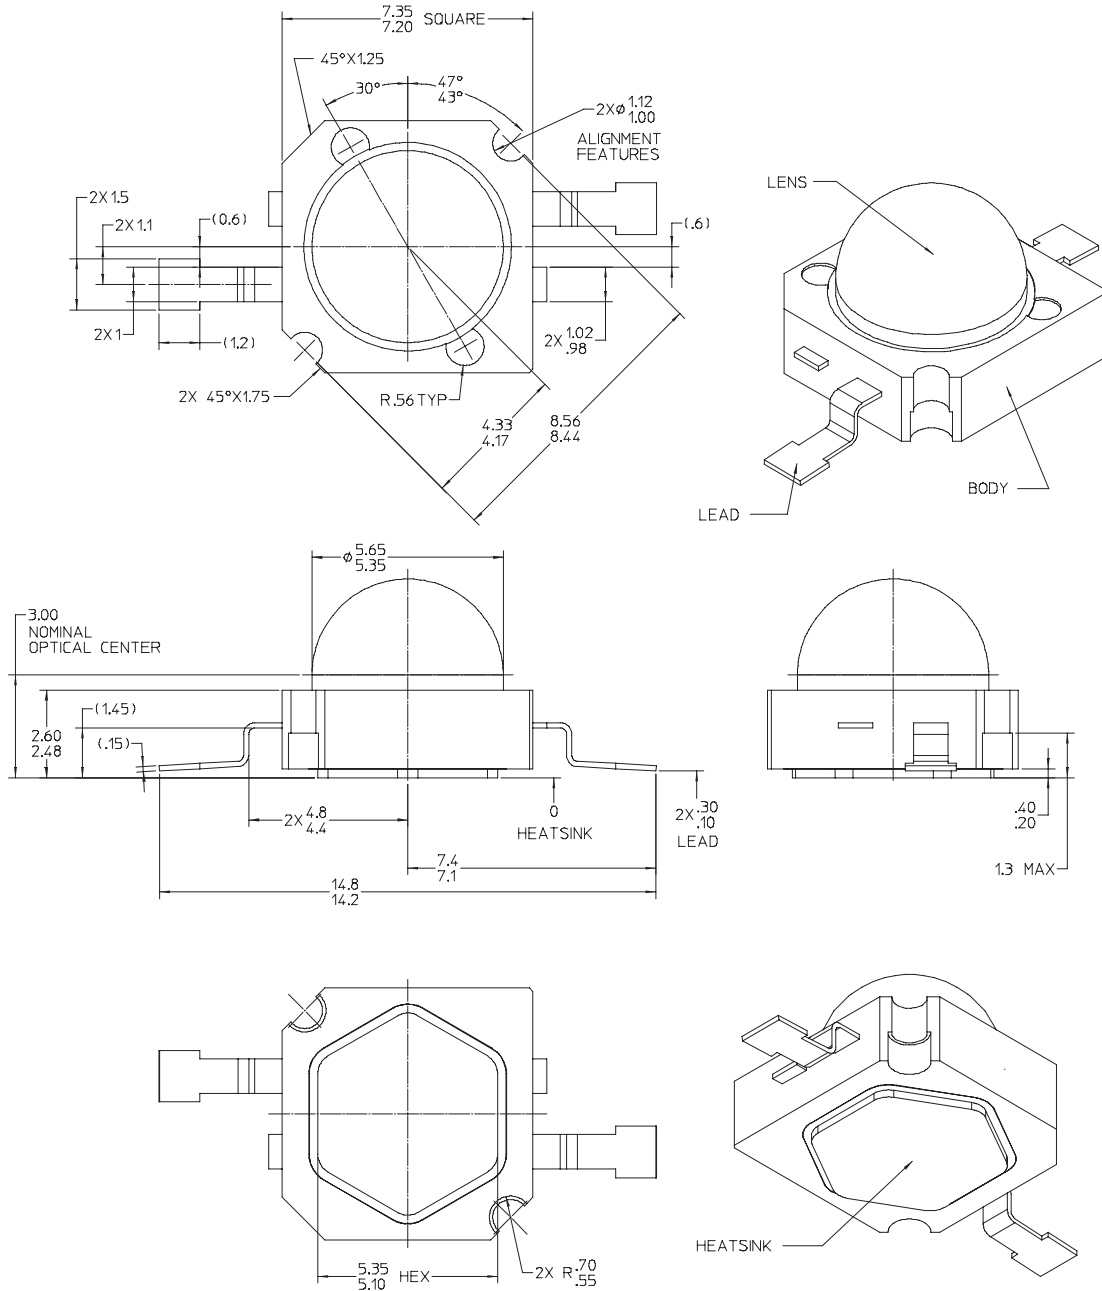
2-Lead Gullwing Package Outline Drawing.
